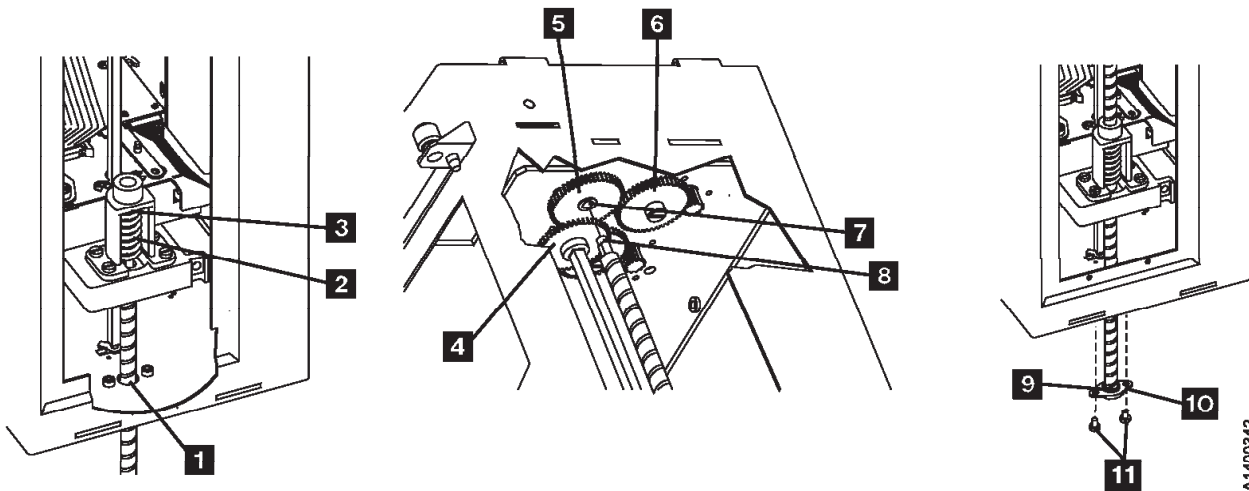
Gear-driven Leadscrew, Gears, and Bearing
